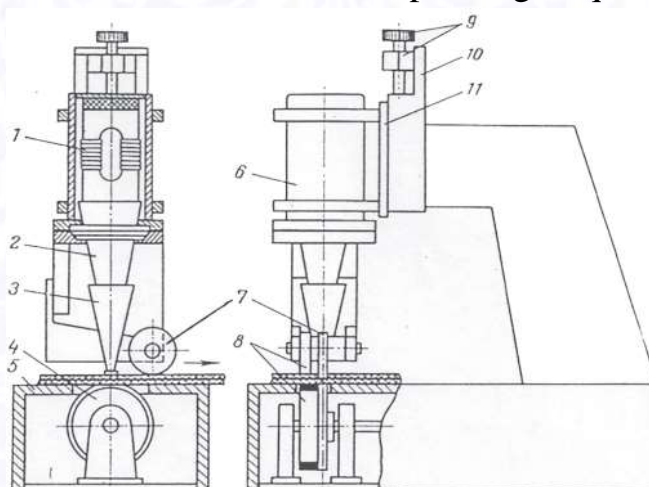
Welding machine UPSH-12: 1 □ converter; 2 □ transformer of elastic oscillations; 3 □ waveguide-tool; 4 □ support-role; 5 □ working table; 6 □ converter fence; 7 □ rolling roller; 8 □ pulling rollers; 9 □ setting screw and nut; 10 □ bed; 11 □ moving panel.
